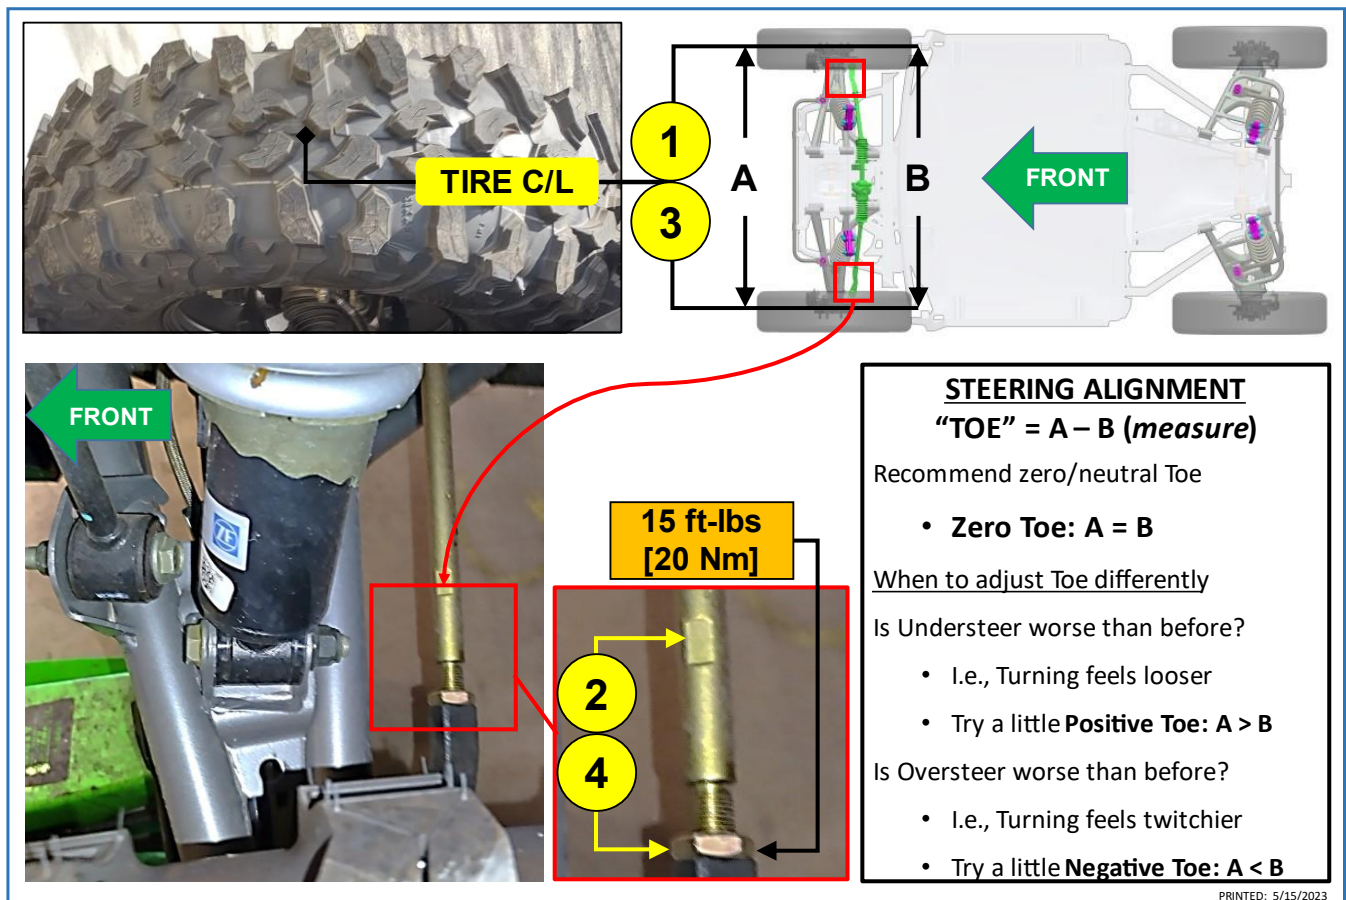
TIP.16 Adjusting Steering Alignment to Zero/Neutral Toe
